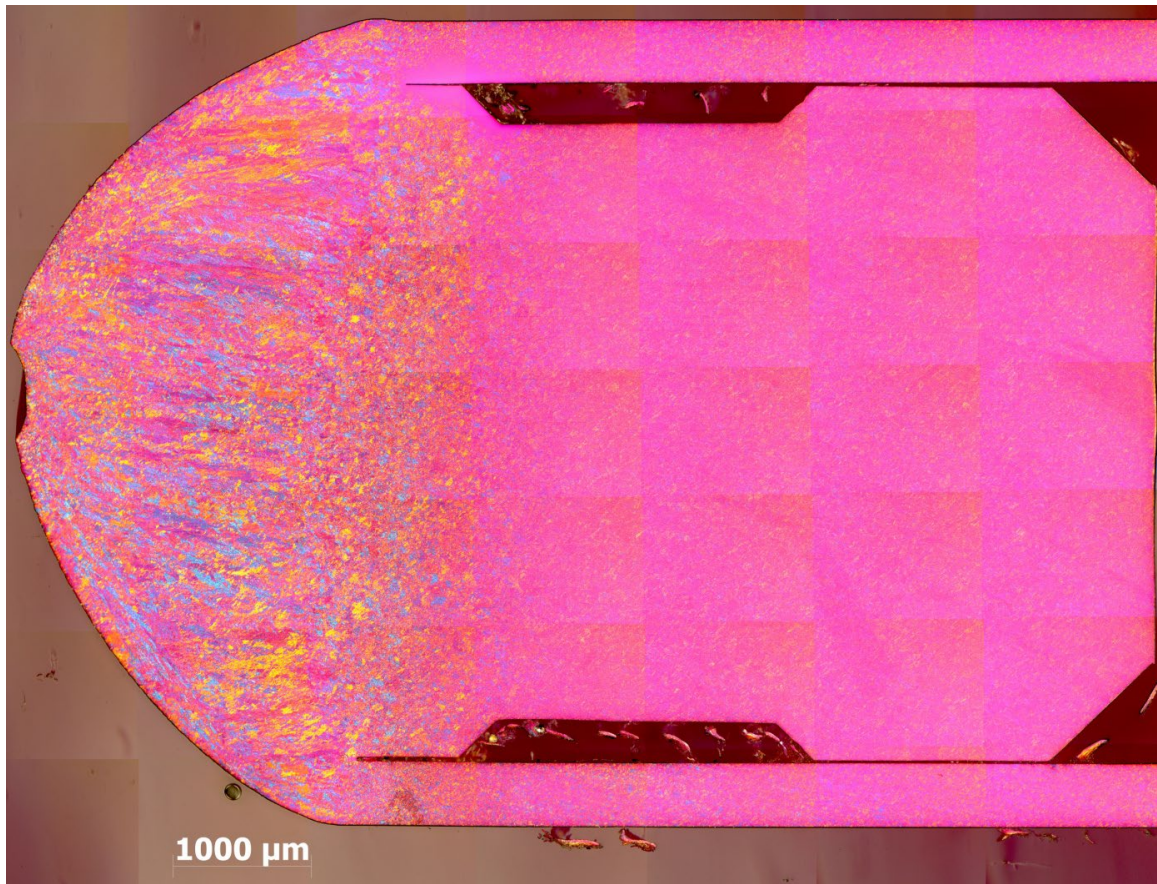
Mosaic of the weld and plug of the top end weld.
